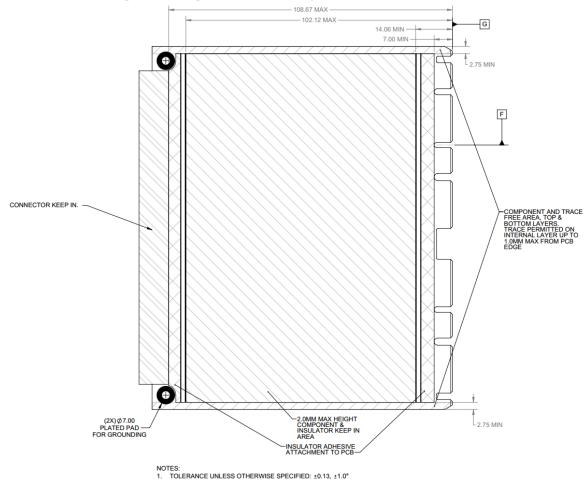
Large Form Factor Keep Out Zone – Bottom View
